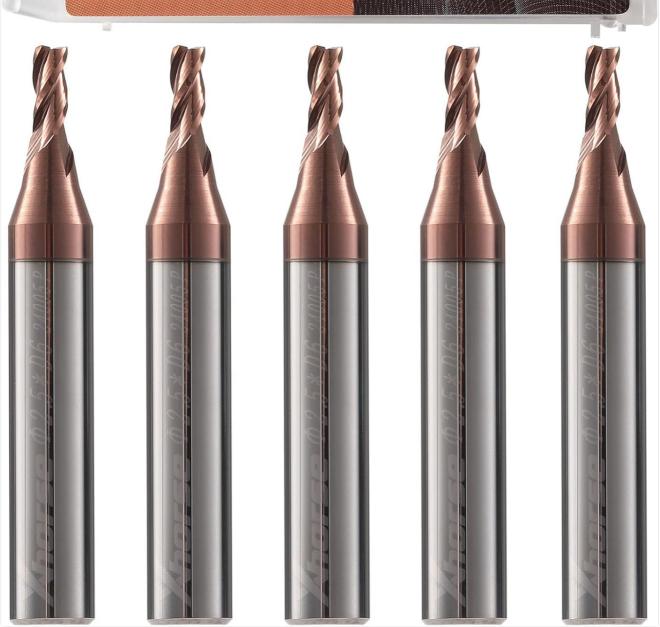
Xhorse 2.5mm Milling Cutters in packaging.
